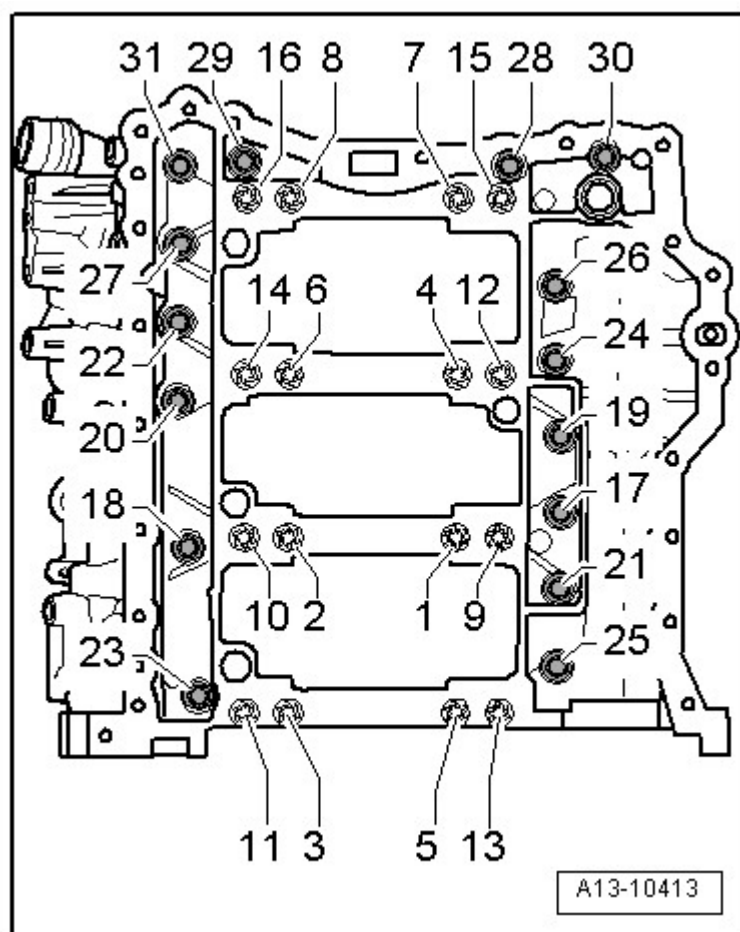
Identifying Guide Frame Bolts Tightening Sequence
